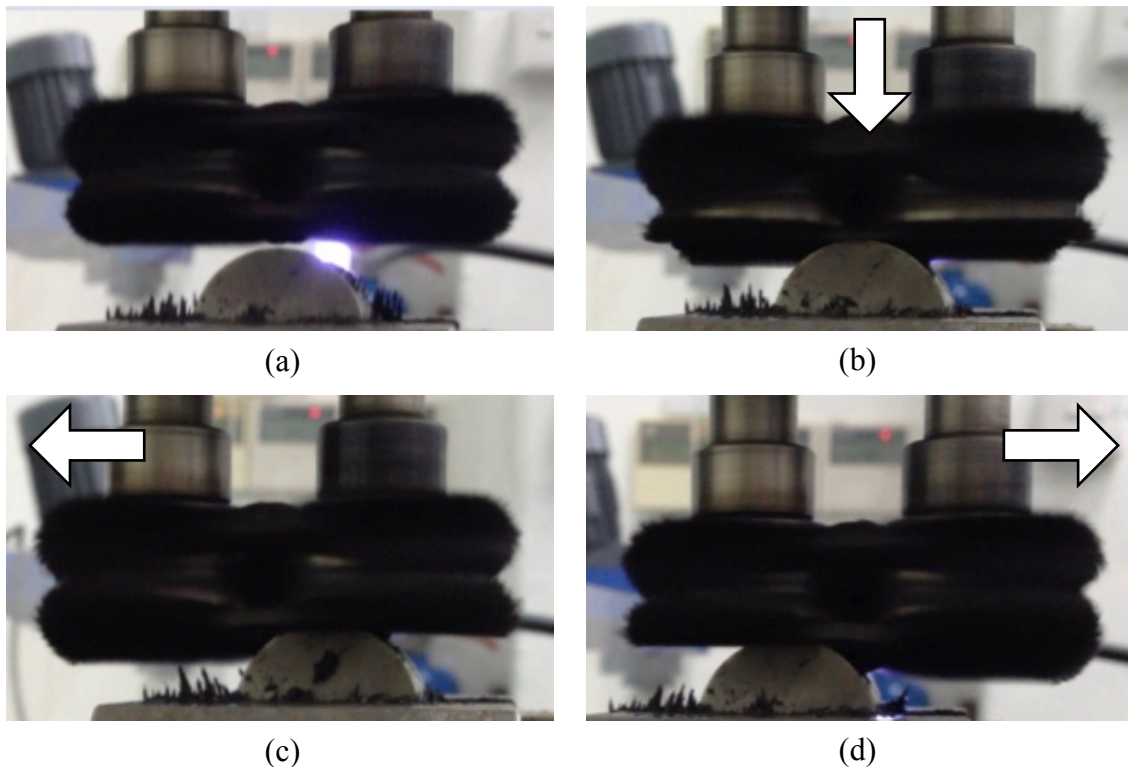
Shape of the finishing media during the polishing process using the double-magnet configuration (a) before polishing, (b) after initial contact with the workpiece, (c) after losing contact with the workpiece, and (d) after coming into contact with the workpiece again.
